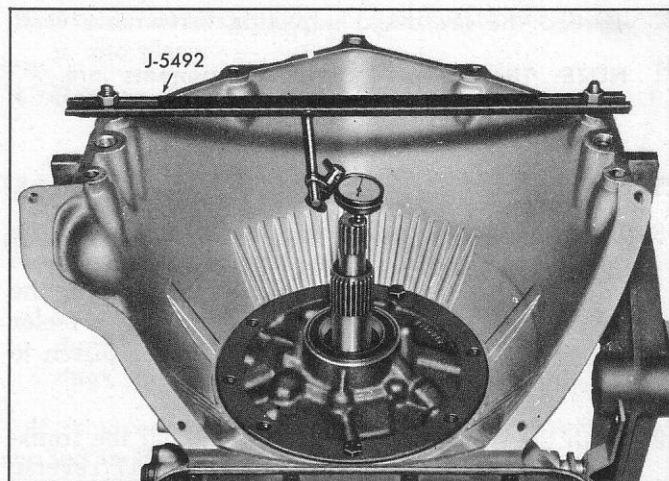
Checking End Play for Proper Thrust Washer Selection
